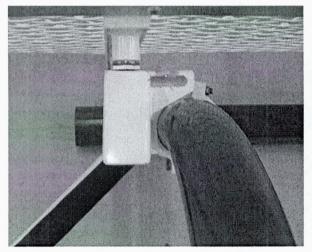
Beam Adjustment, Step 1 – Shim Rear Beam
